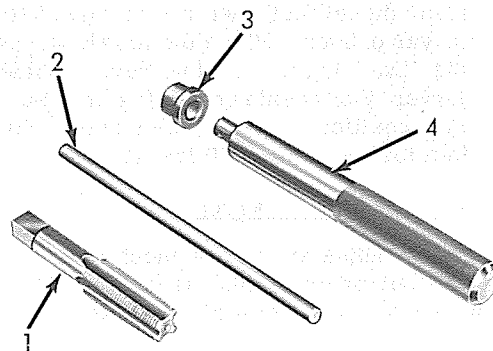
Fuel Injection Nozzle-Holder Sleeve Removing and Installing Tool Details (T-22342)
